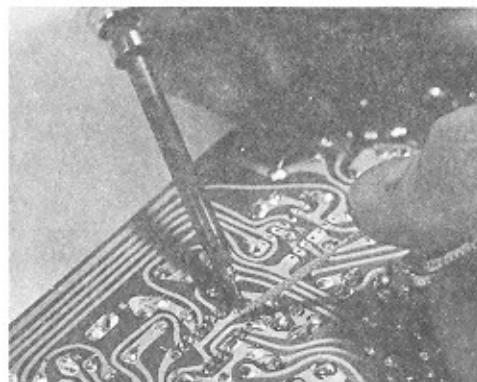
USING BRAID TYPE SOLDER REMOVER
